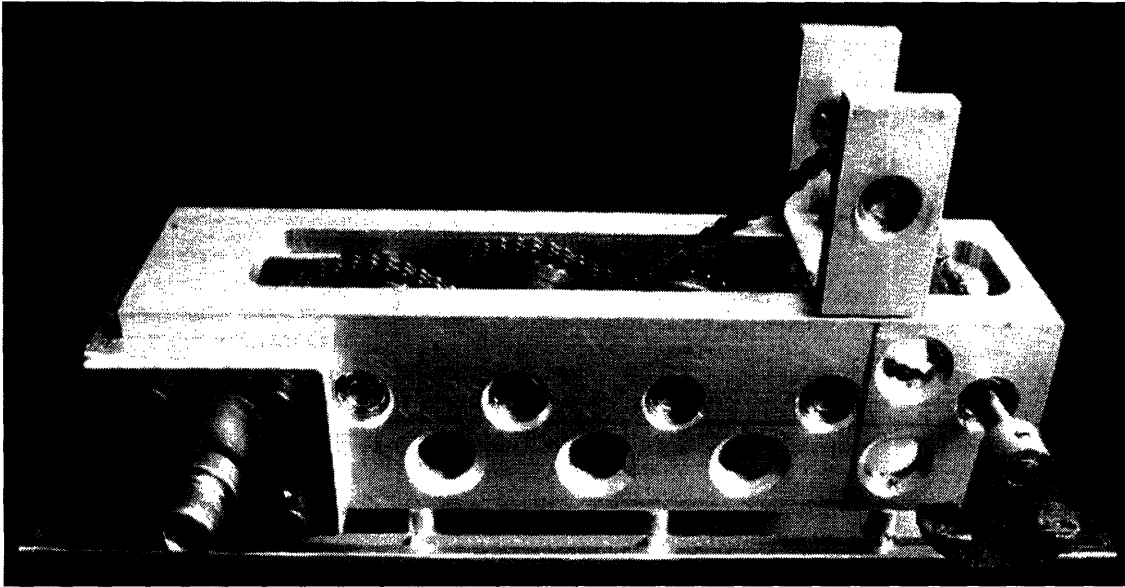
Crank side photograph showing primary axle with reinforcement and outboard idler pulley.
